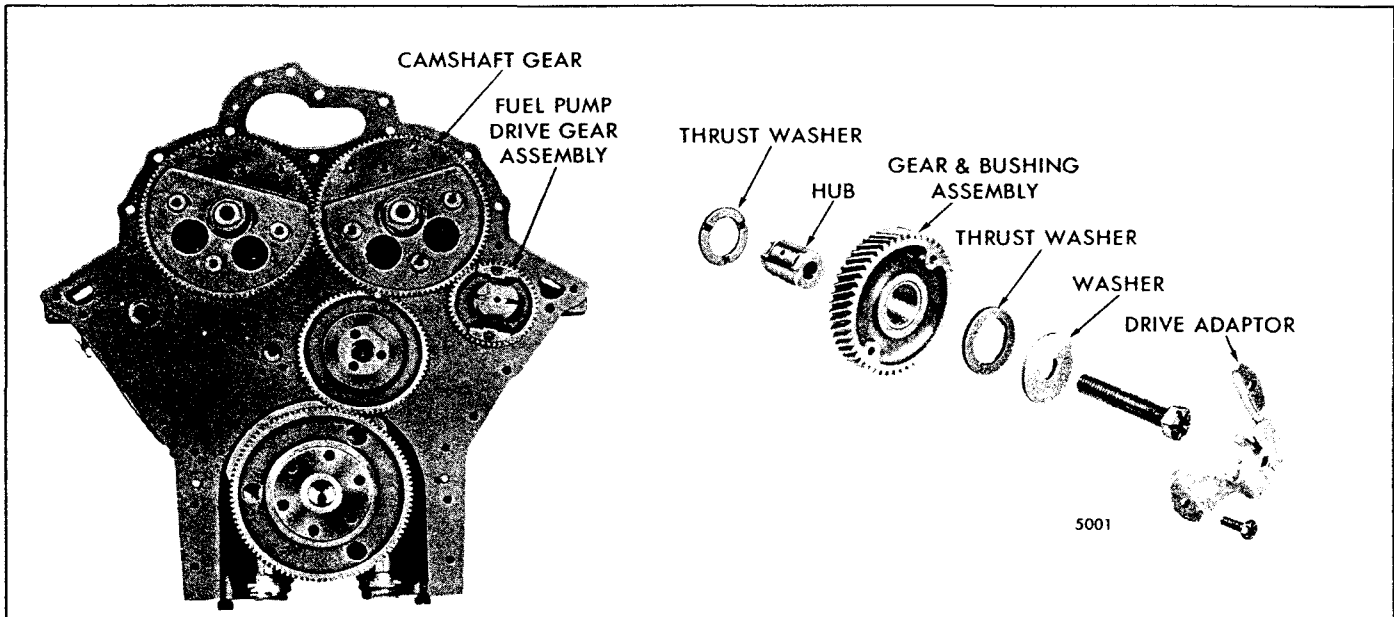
Typical Fuel Pump Drive Gear Mounting and Details (V-Type Engine)
